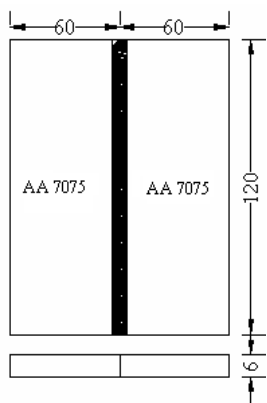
Plates with Copper Insert in the Faying Sides, Before Welding
